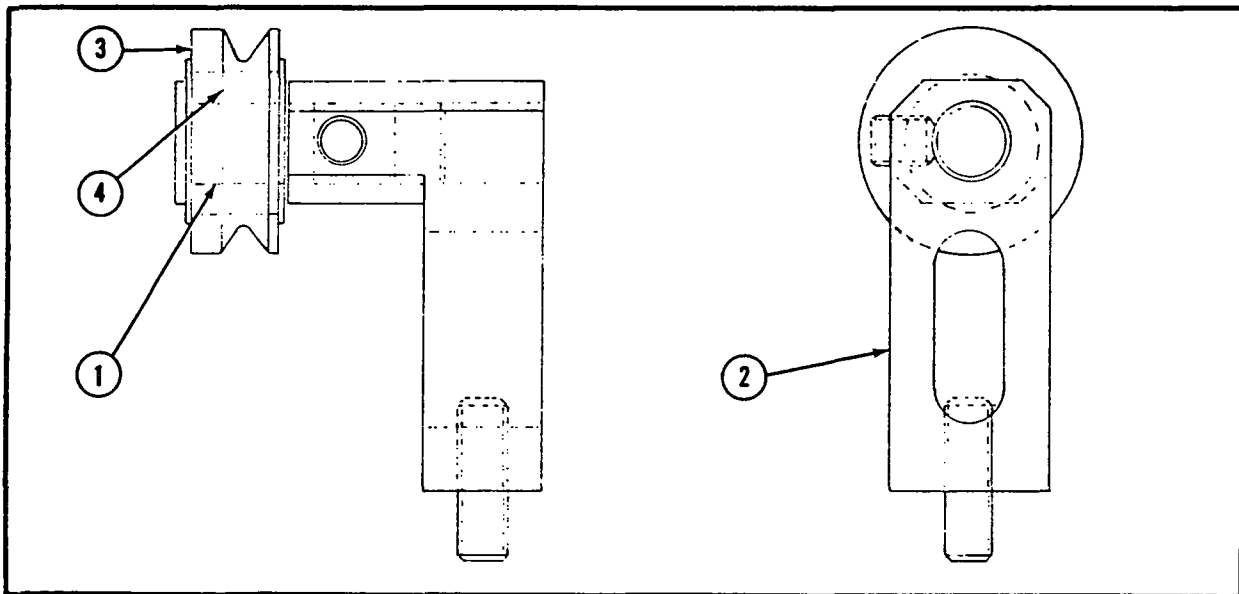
COBALT COLLIMATOR MAIN CROSS PULLEY ASSEMBLY
